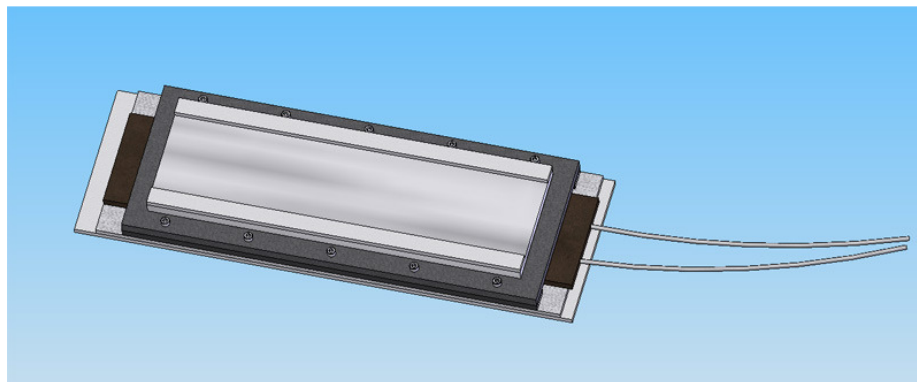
The Heating and Welding System Drawn in CAD
